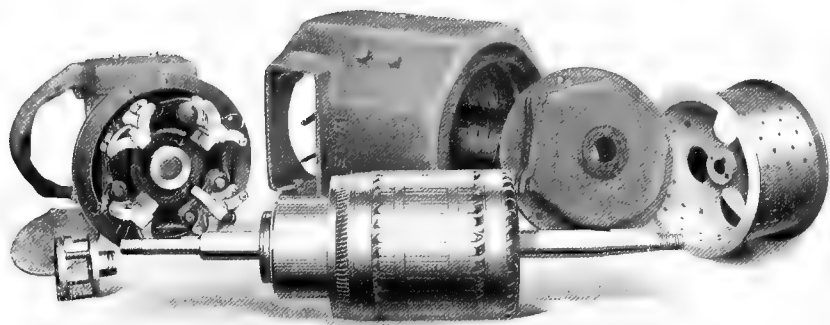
Main Parts of Plain Bearing Generator, Gould Simplex System of Car Lighting.
